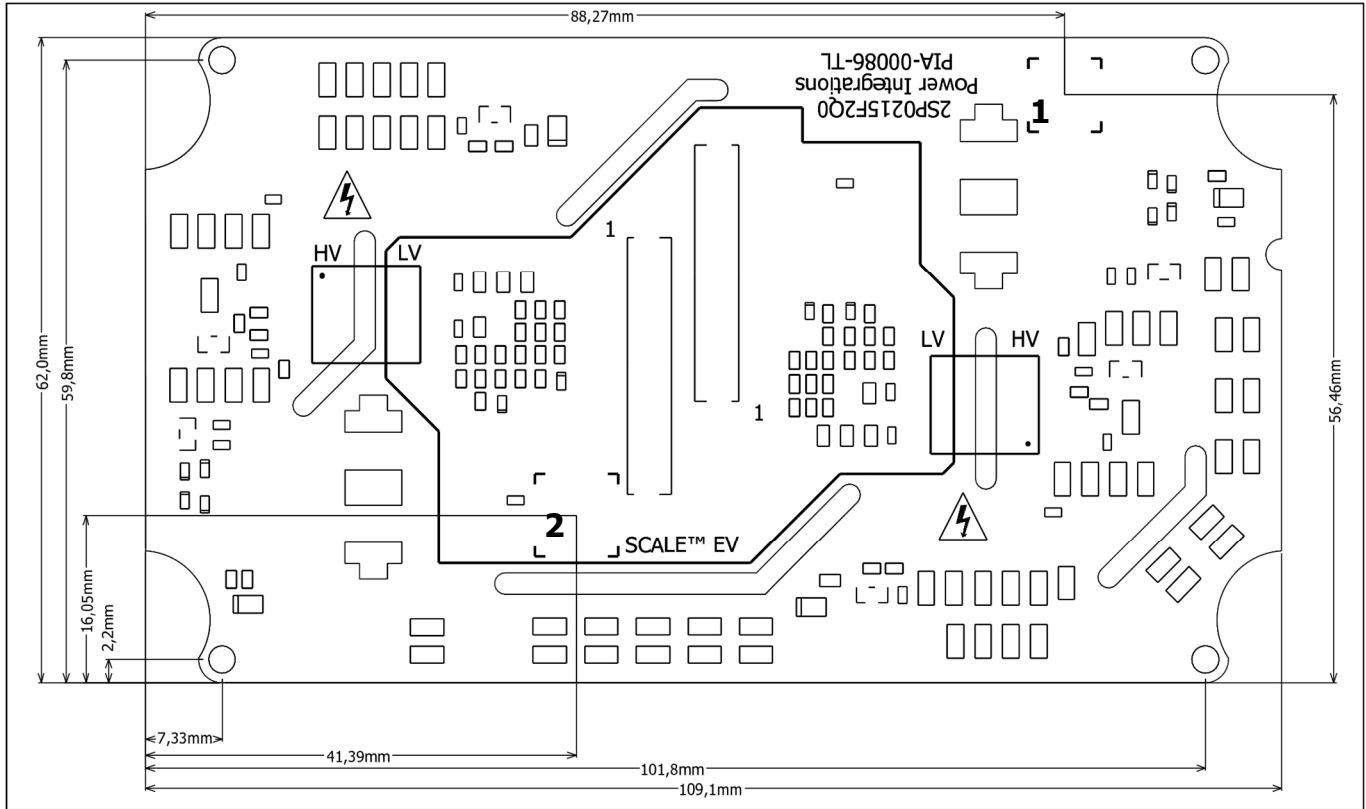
Technical Dimensions 2SP0215F2Q0C Gate Driver Board Top View
